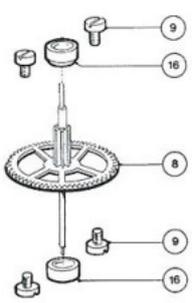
4<sup>th</sup> wheel and pinion assembly
